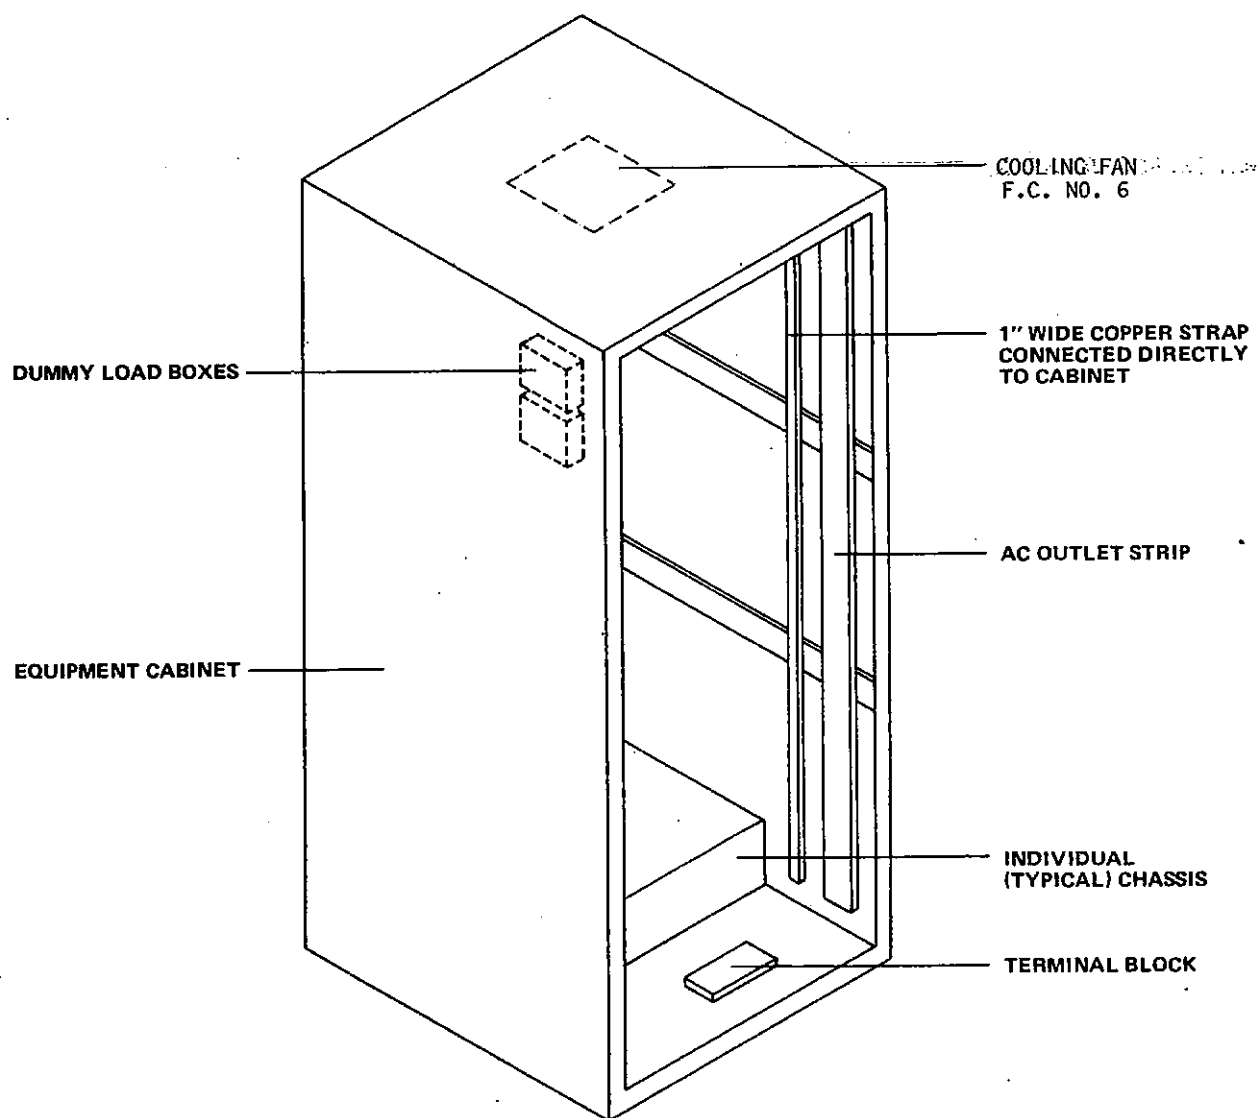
Electrical Equipment Cabinet (Rear View)
